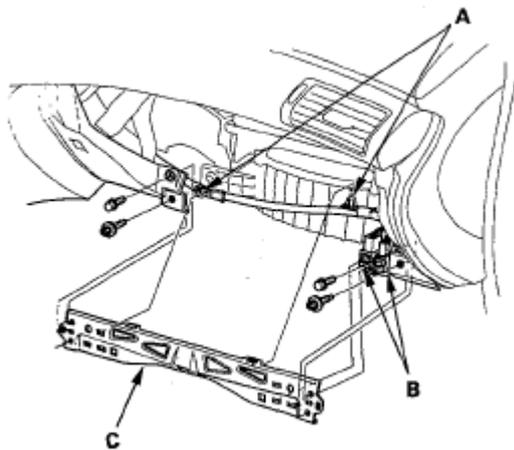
Identifying Wire Harness Clip, Connector Clips And Glove Box Frame
